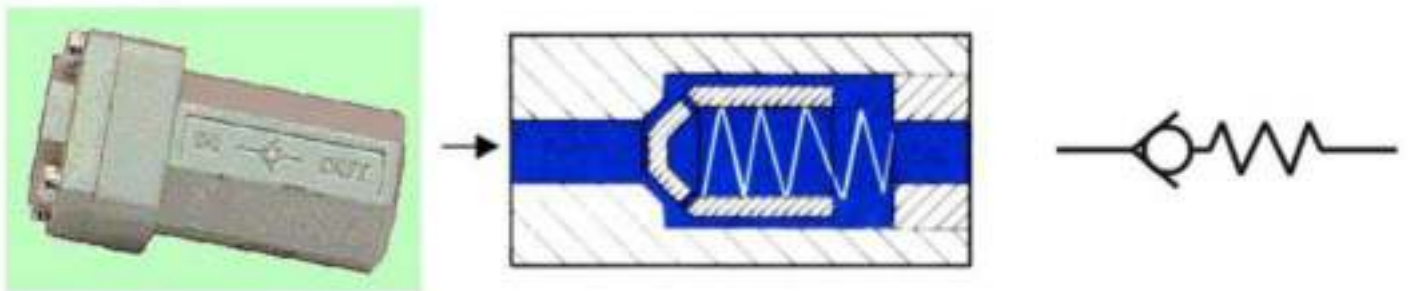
(a) Non-return valve (b) Cross section (c) Pneumatic symbol
